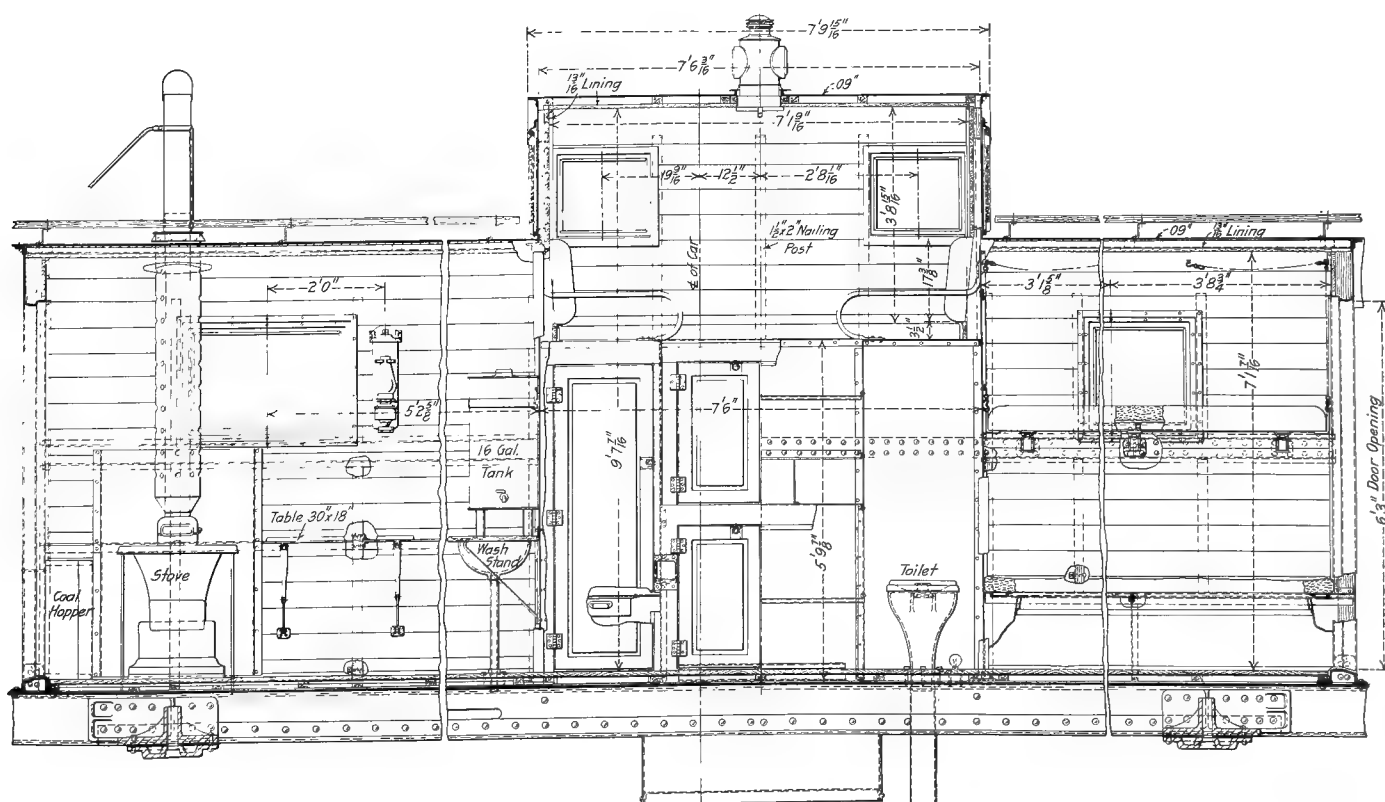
Longitudinal Section Through Pennsylvania Railroad Steel Caboose Shown in Figs. 118, 120 and 367-369.
